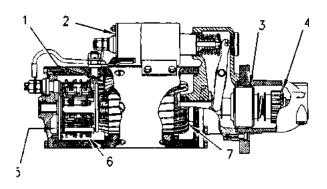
Starting Motor Cross Section (Typical Example)(1) Field. (2) Solenoid. (3) Clutch. (4) Pinion. (5) Commutator.(6) Brush assembly. (7) Armature.
